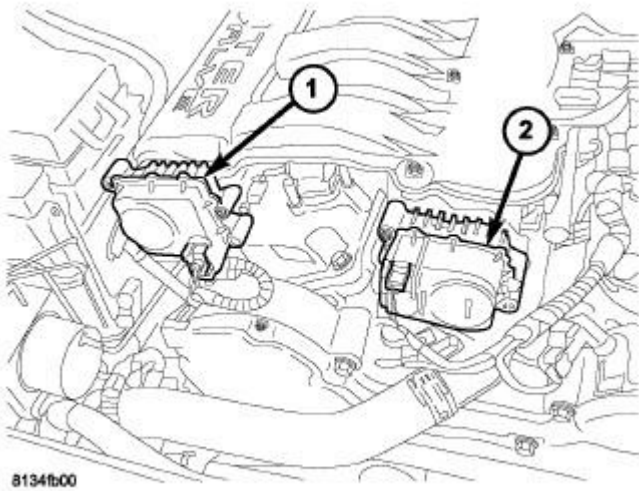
Manifold Tuning Valve And Short Runner Valve
